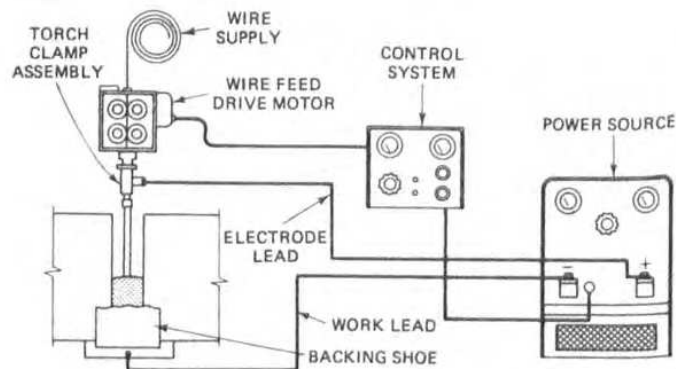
The welding circuit used in the electroslag process.
